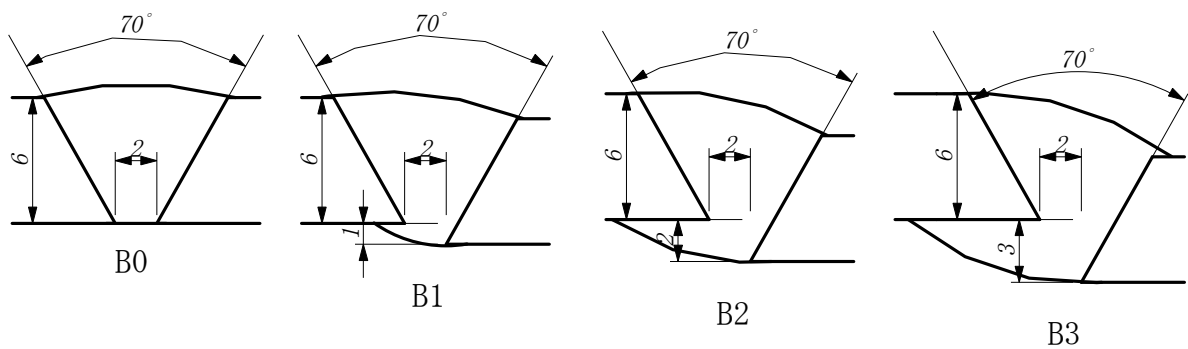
Weld preparation dimensions of butt-welded joints.
